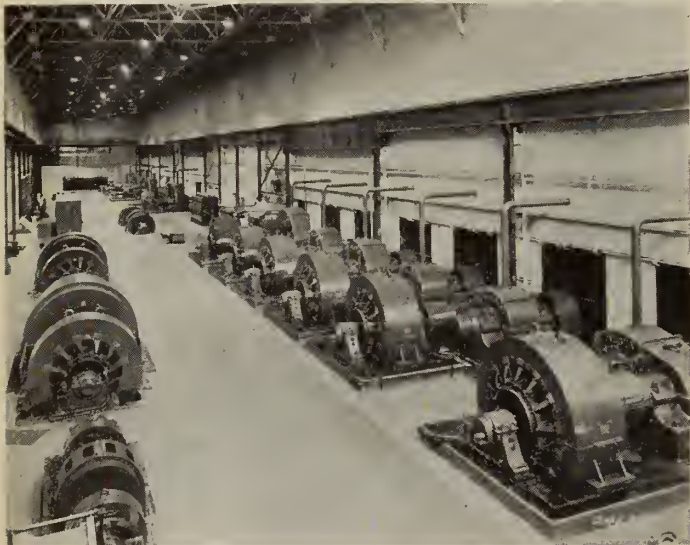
Hot strip mill motor room showing four 3,000 hp. synchronous motors driving the roughing stands and six 3,000 hp. direct current adjustable speed motors driving the finishing stands.
